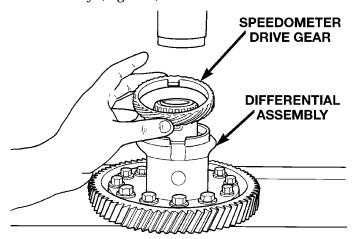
Speedometer Drive Gear Removed INSTALLATION
